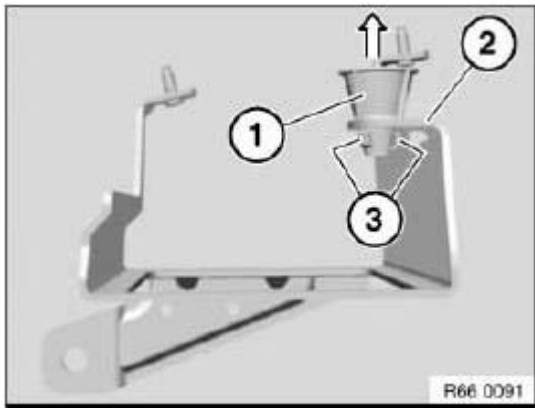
Detaching Adjustment Aid Of Retaining Plate
